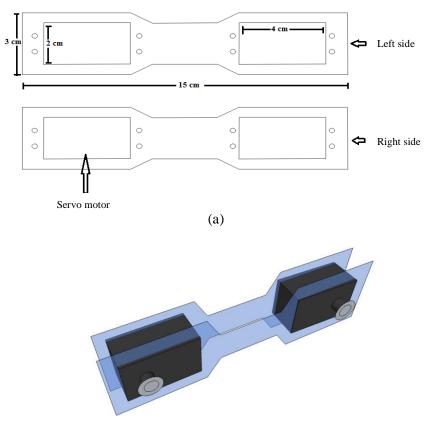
Mechanical design of elbow part: (a) Link to the shoulder (2D drawing); (b) Link to the shoulder (3D drawing).
